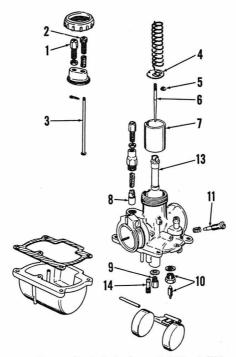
Exploded view of Mikuni VM type carburetor.
